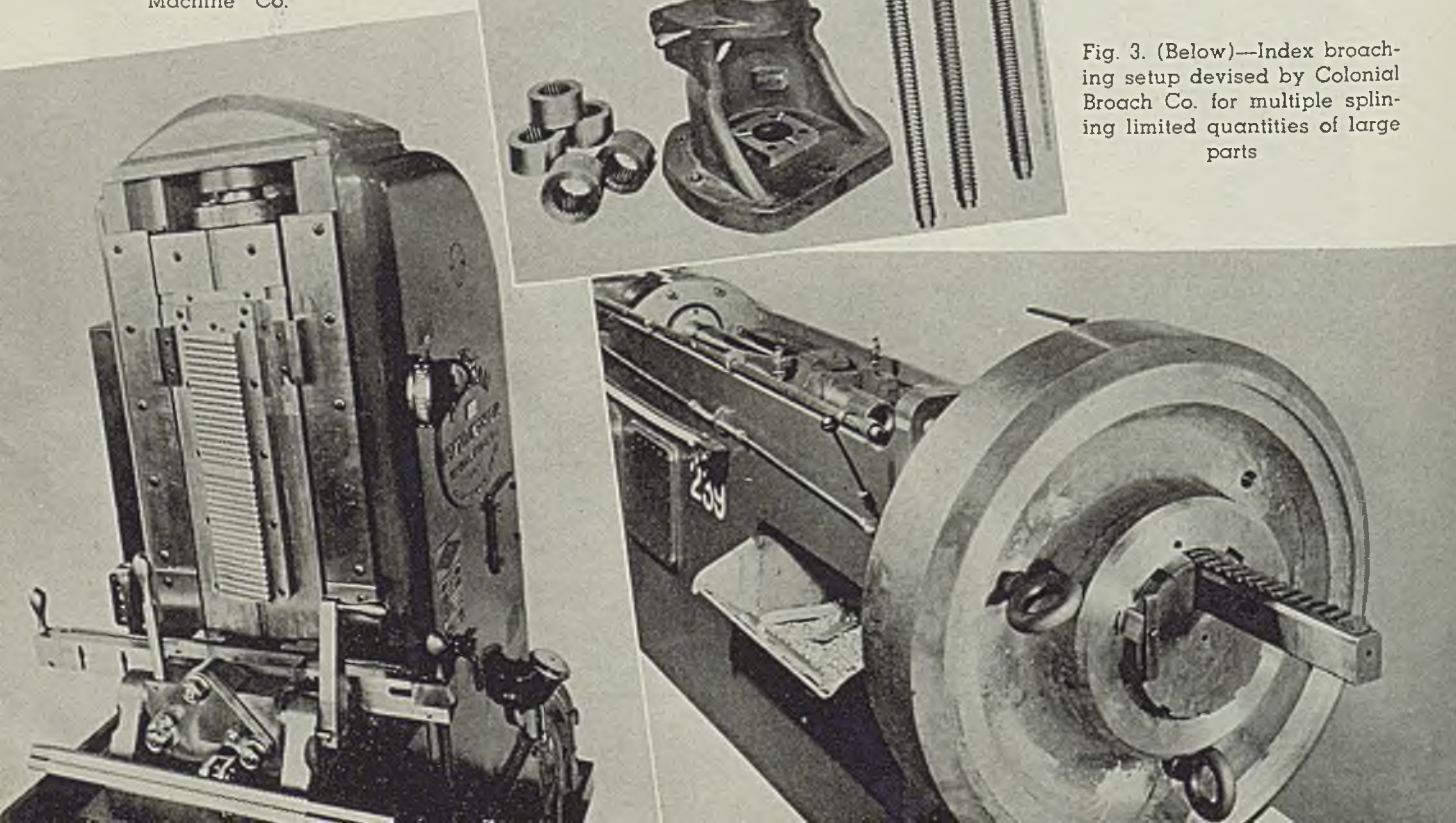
(Left)—National Broach & Machine Co. tools and fixture for accurate broaching of helical teeth in internal gears shown herewith
